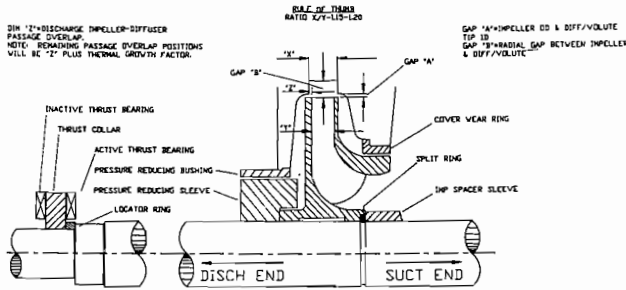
Impeller-Diffuser Passage Overlap in Multistage Pump.
